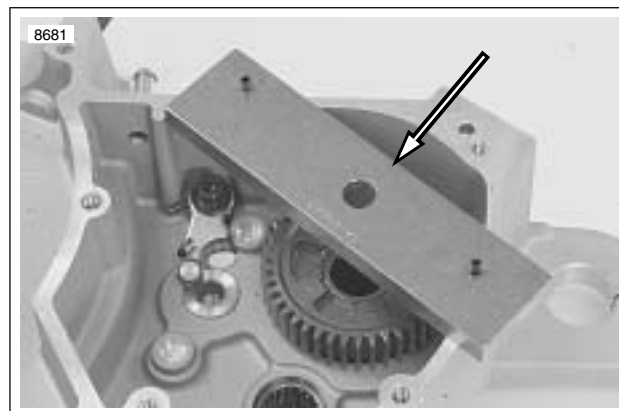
Bearing Remover Cross Plate Mounting (Part No. B-45847)
